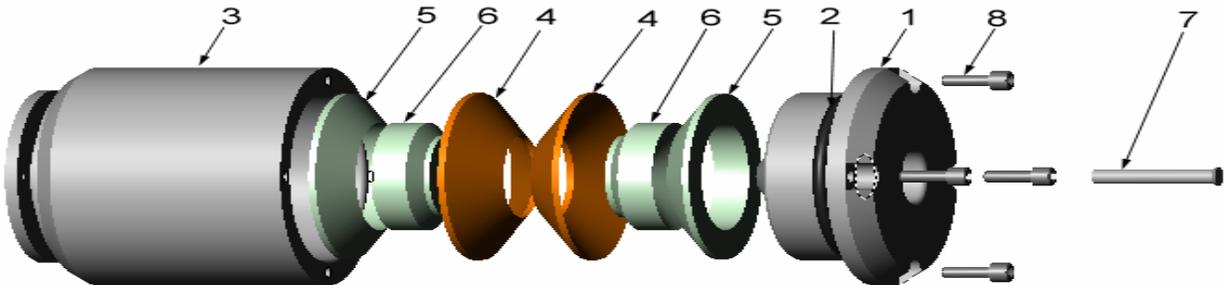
Exploded View, sizes 3.43-in - 3.812-in
